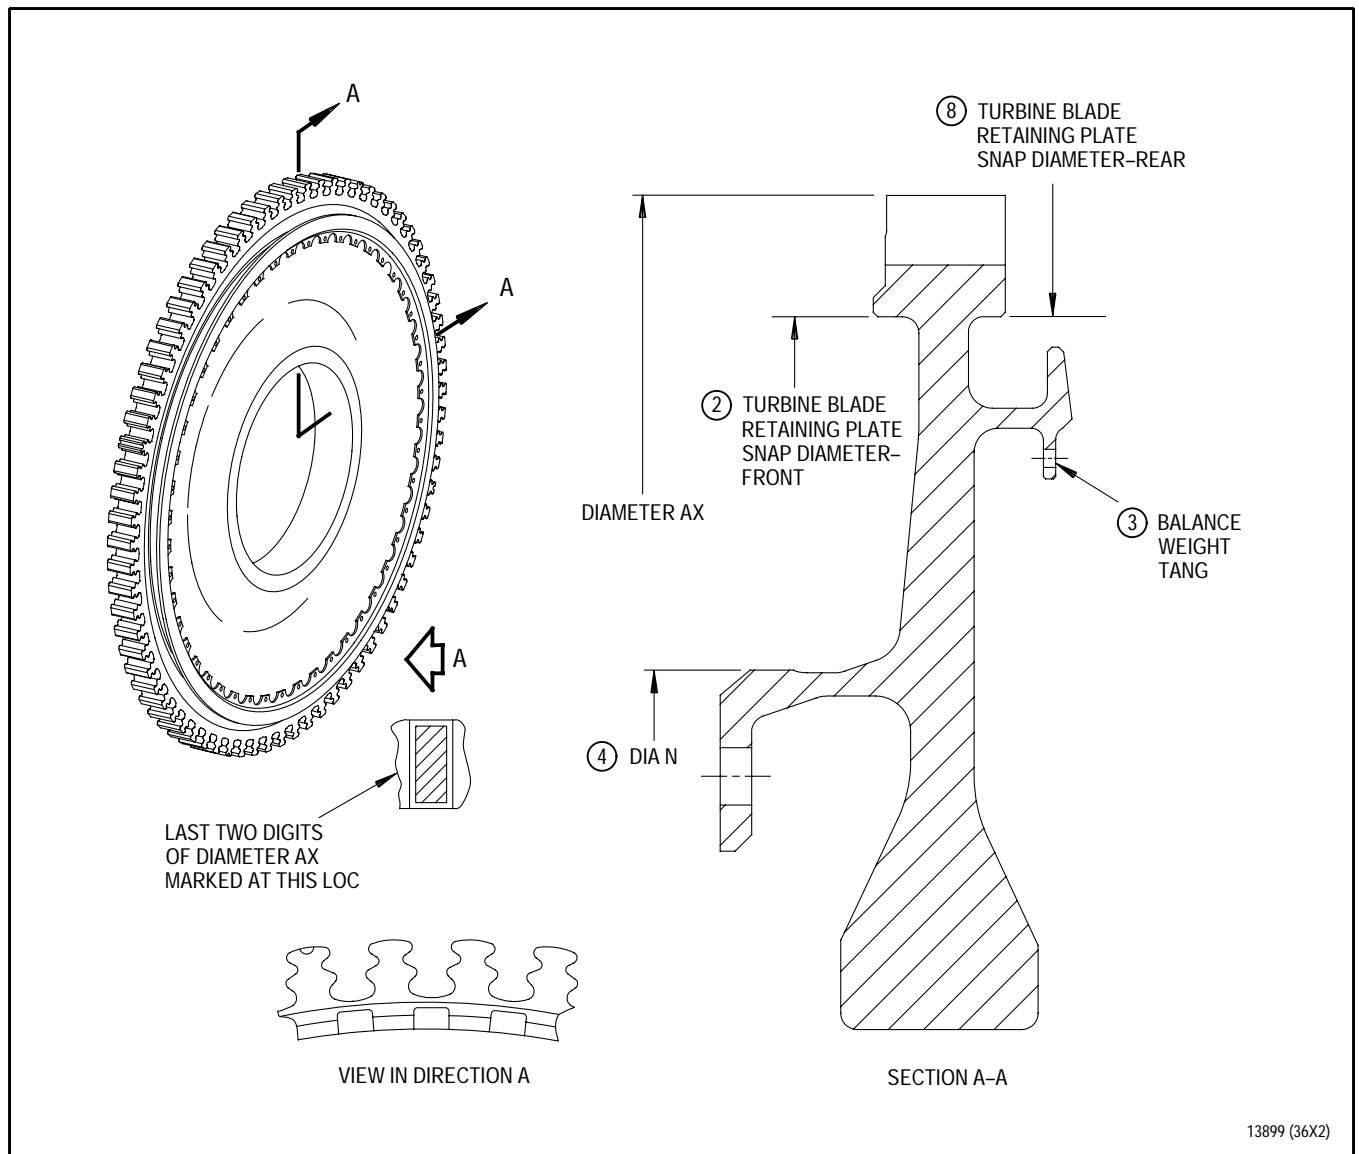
Second Stage Turbine Disk - Inspection (Sheet 2 of 3)
